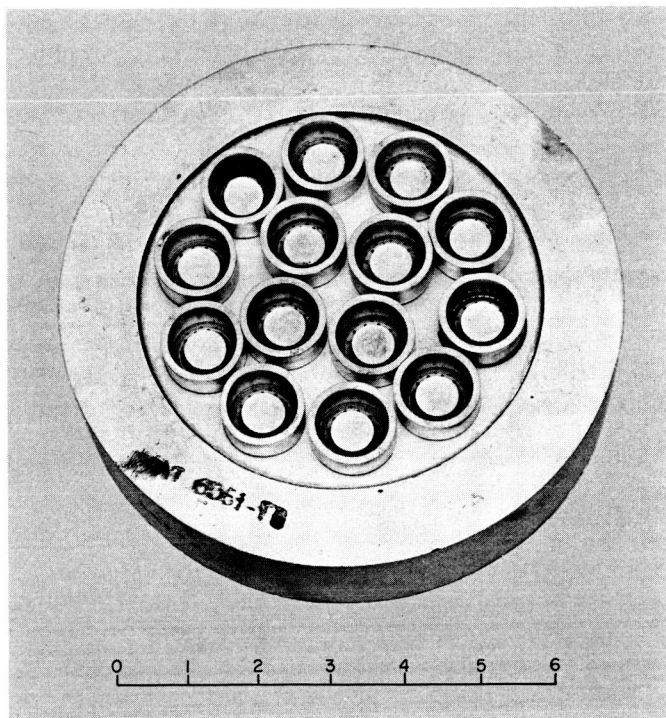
Fourteen-element Injector 62721 with central deflection posts in cylindrical combustion cups
